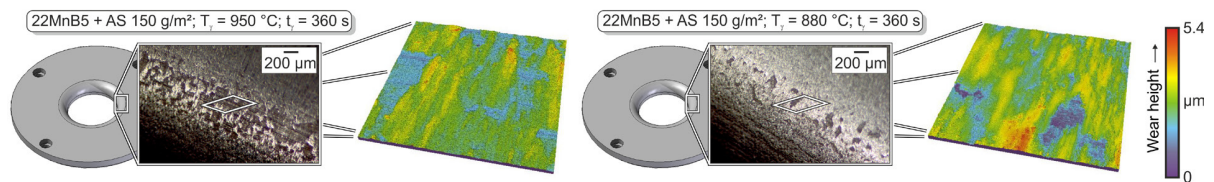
Example of adhesive layer build-up on hot stamping dies after 23 drawings [2].
